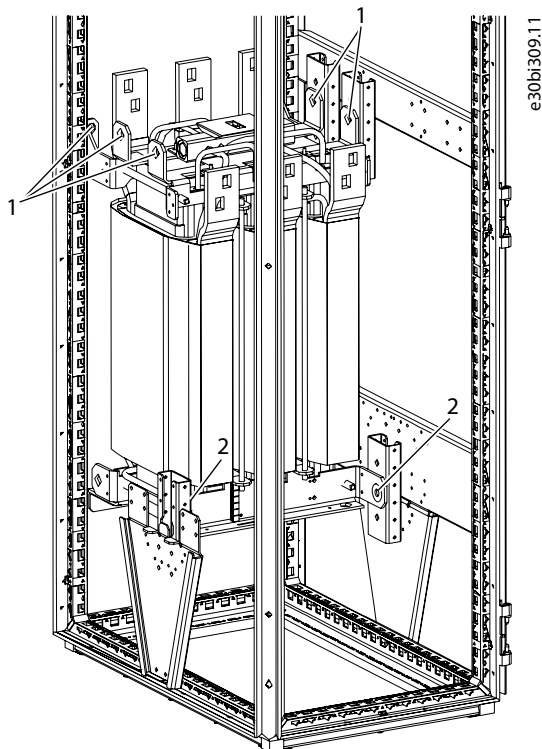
Installing the L Filter into a Cabinet (1640 A)
